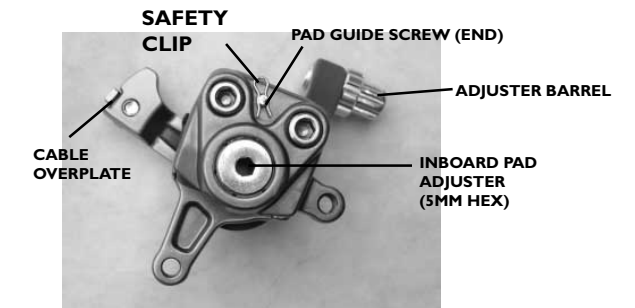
BACKVIEW OF REAR DISC BRAKE
